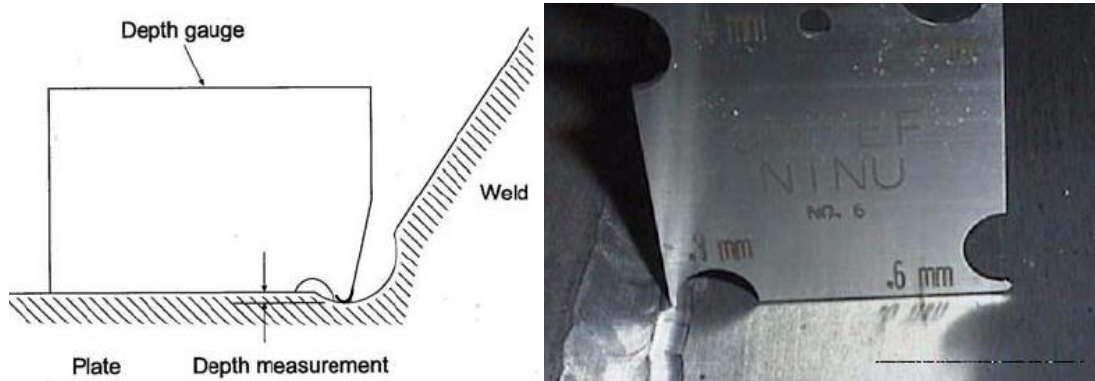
Depth gauge measurement device (Haagensen & Maddox, 2001)
